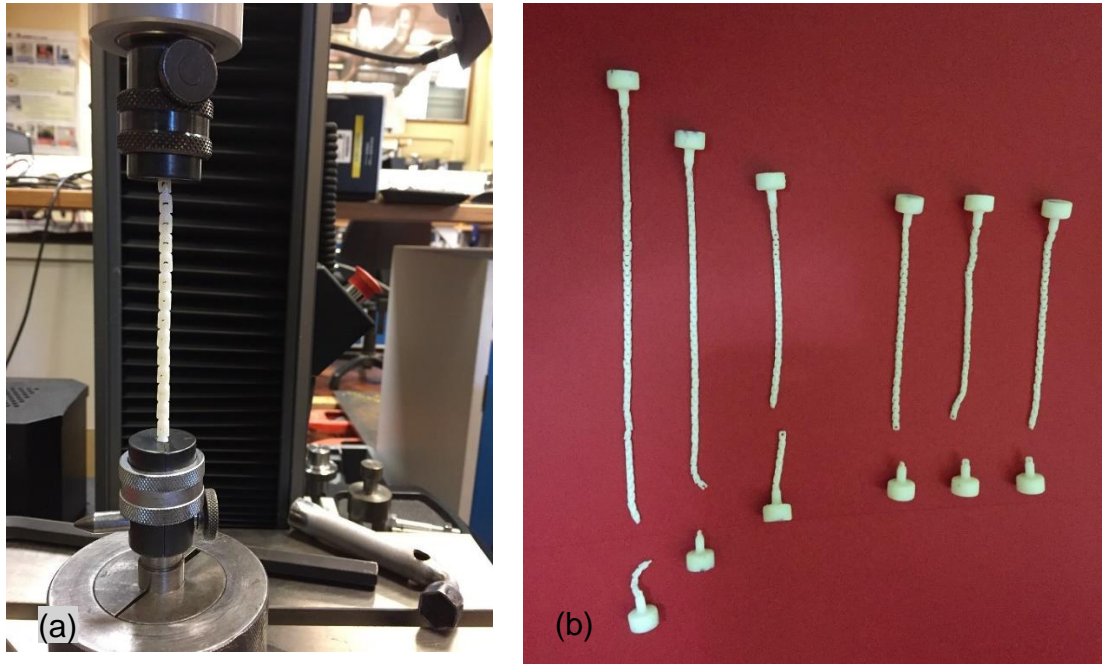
(a) Tensile testing machine. (b) The 3D printed chains after testing.
